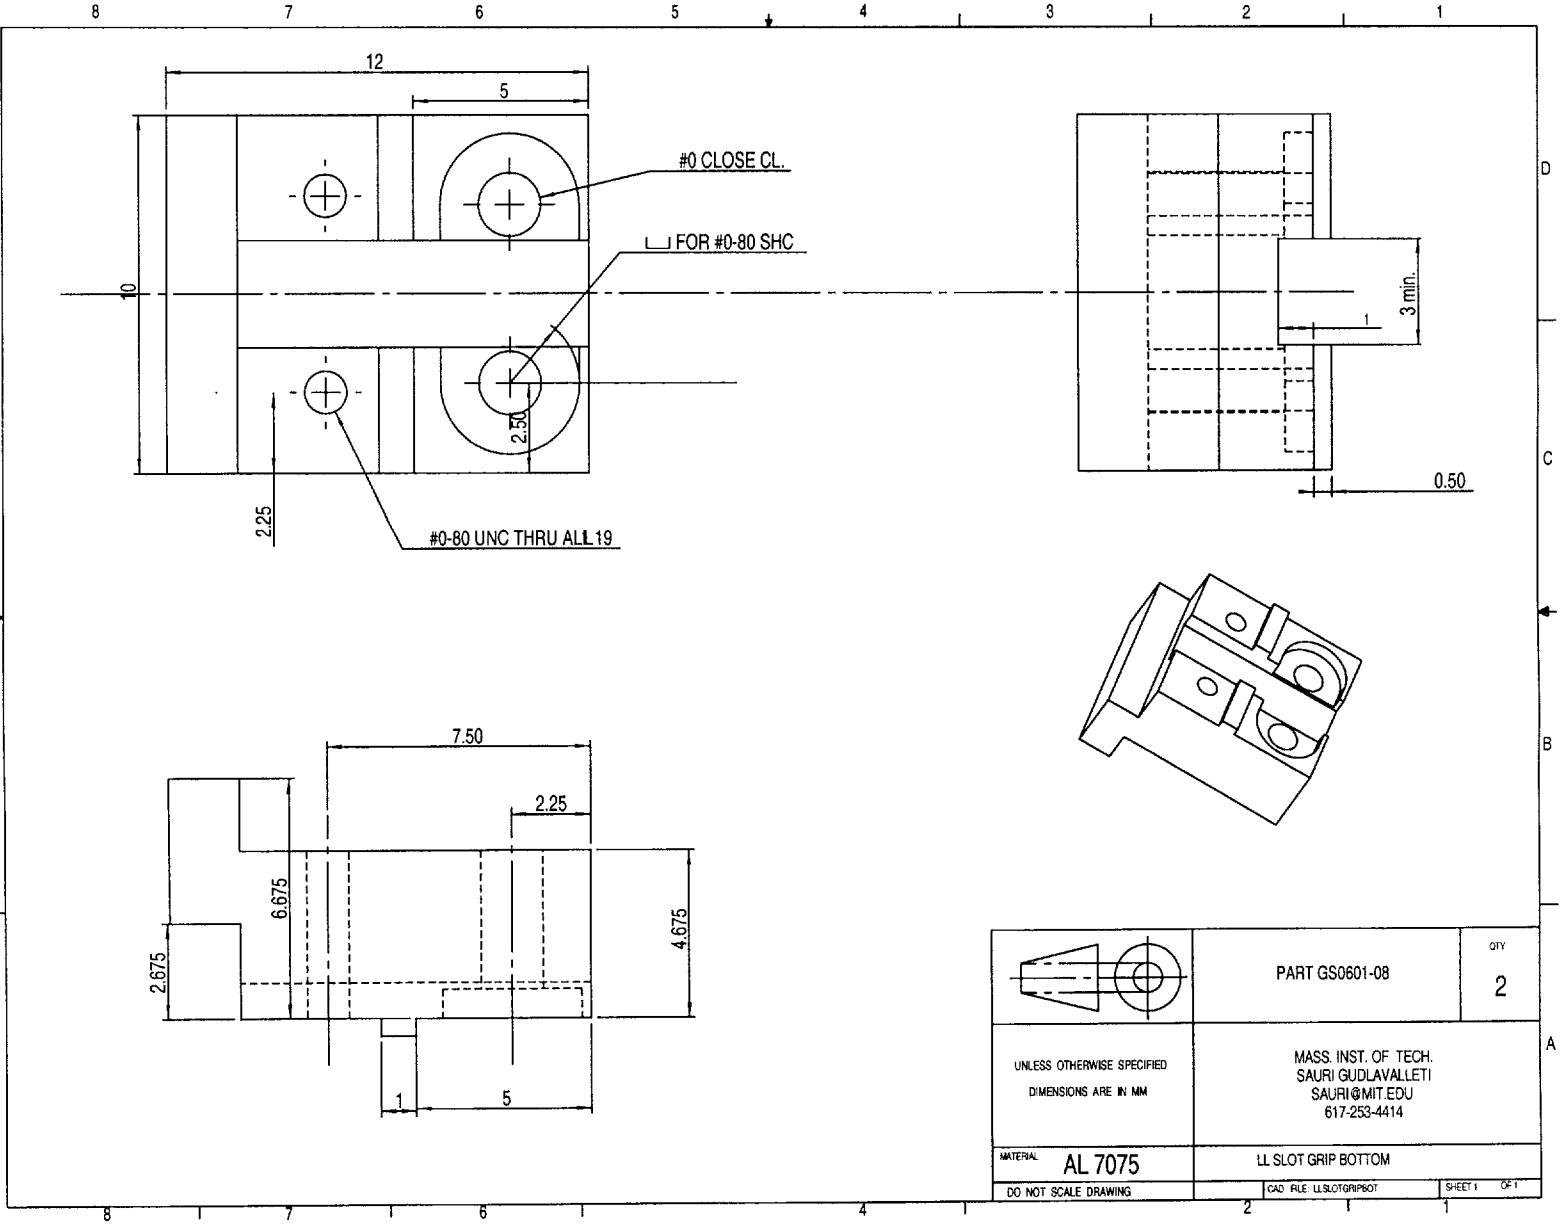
Part GS 0601-08. Foil tension grip with slot for specimens with 3 mm wide grip section. Assembly shown in Fig. (3-5.)
